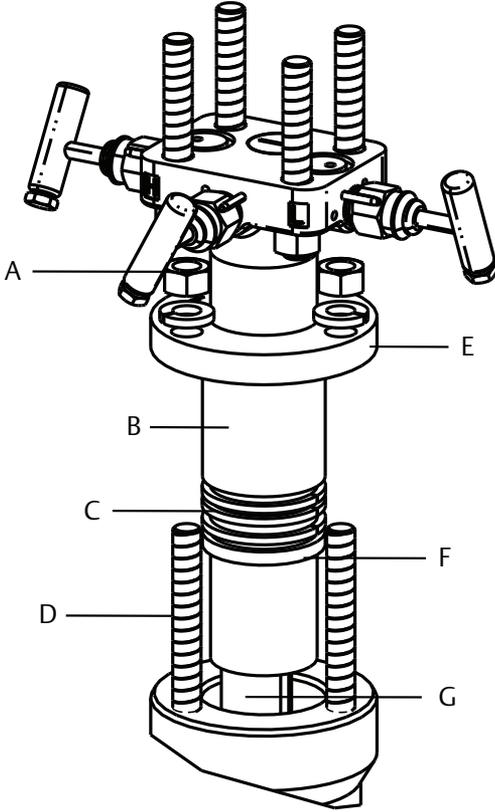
Rosemount 485 Annubar Pak-Lok Assembly Exploded View⁽¹⁾
